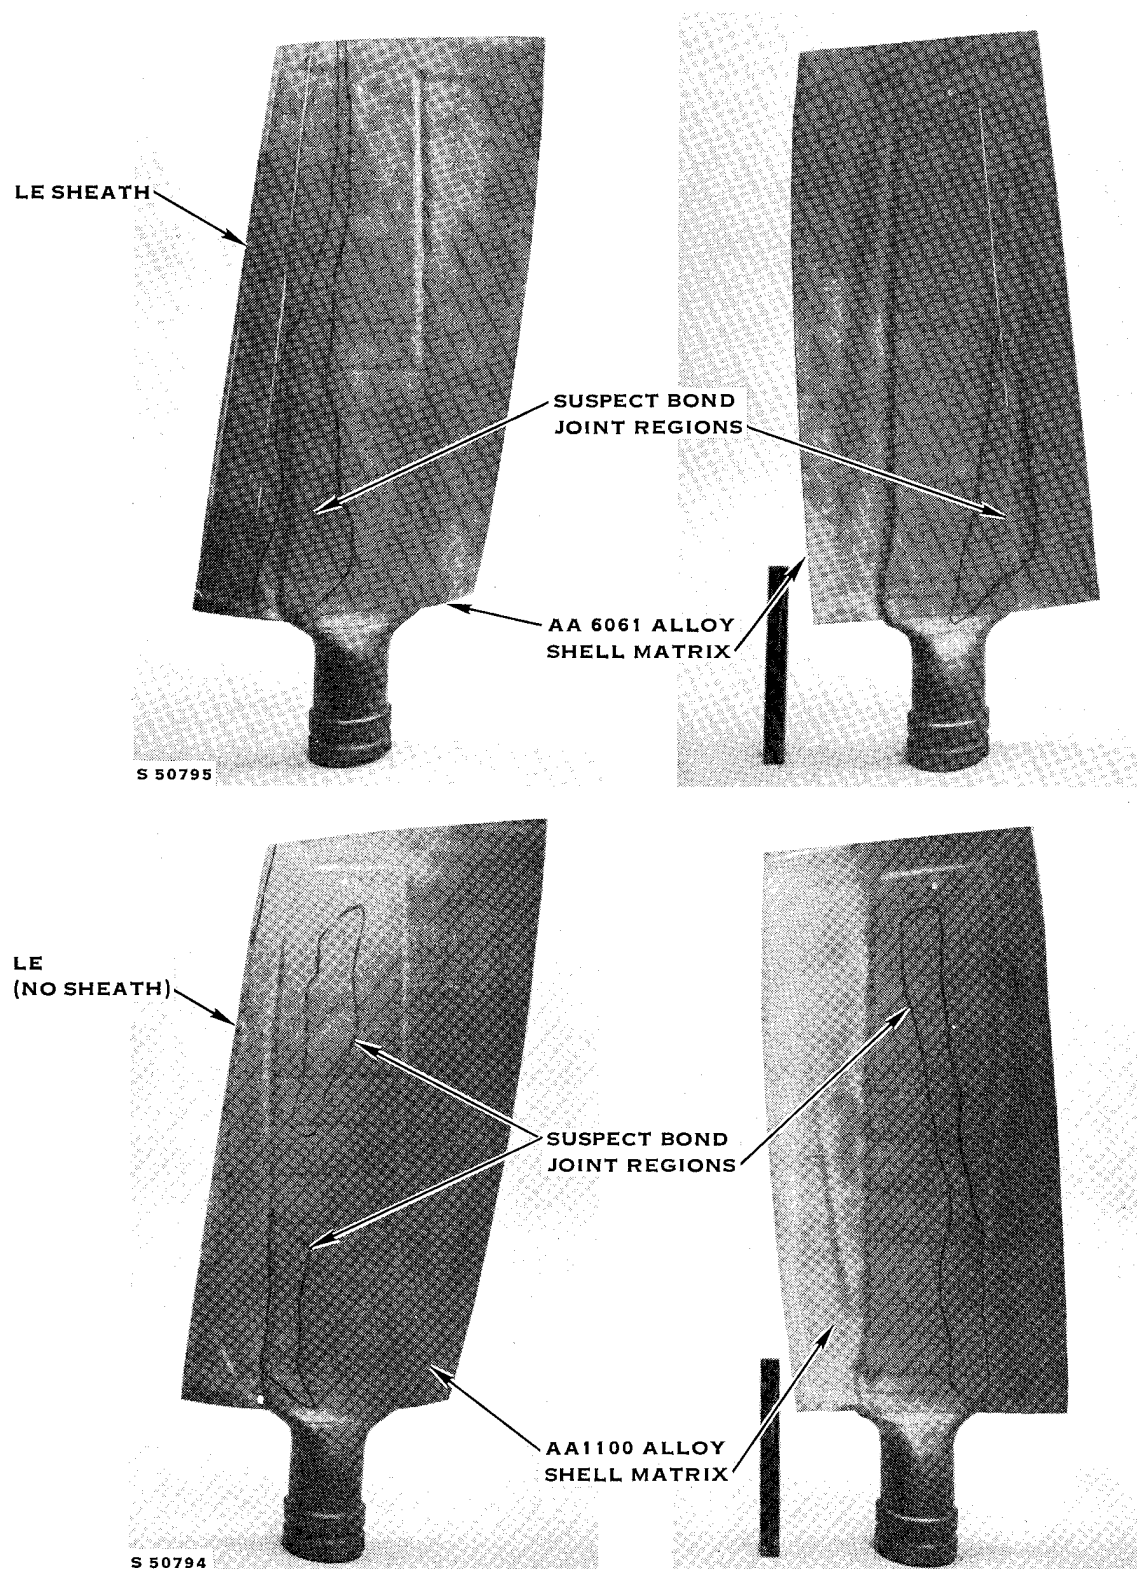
TAP TEST INSPECTION INDICATIONS OF SUSPECT METAL BOND JOINTS OF TWO DEMONSTRATION AIRFOIL PRESSINGS
